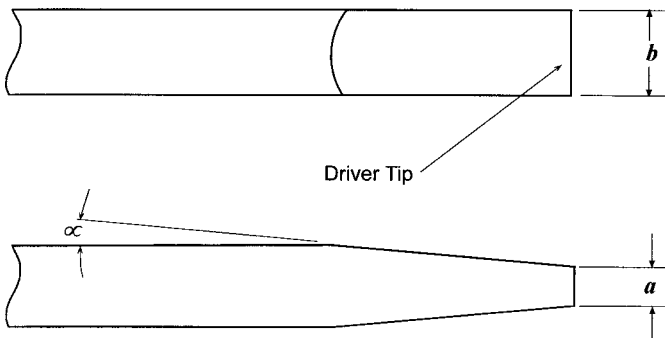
Dimensions of Single-Slot Screwdriver Bit
